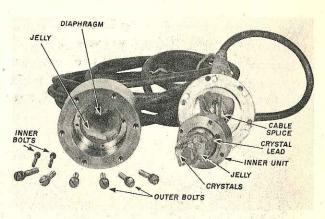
B - Einheits Hydrophone, Exploded View, Showing Construction Details
